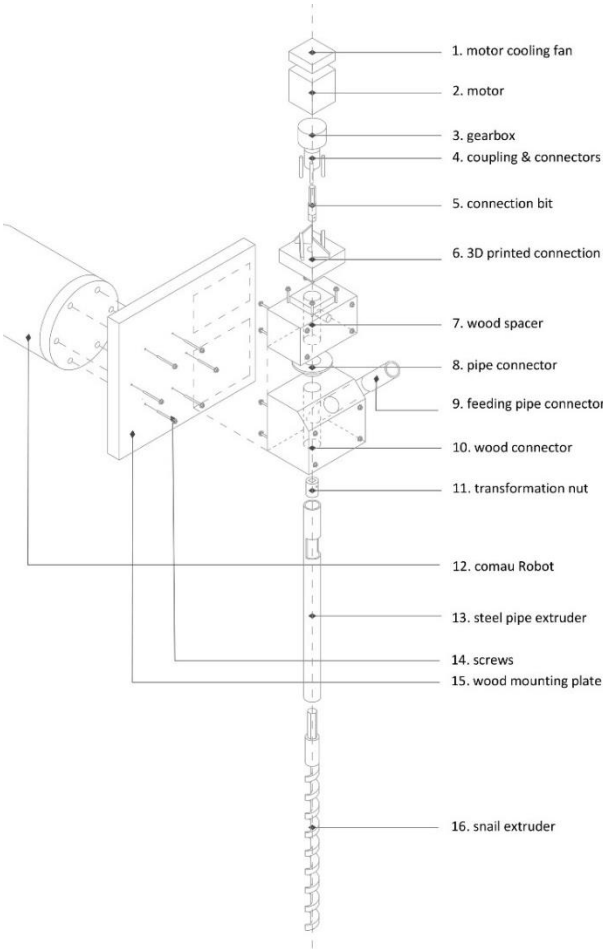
Autor’s: Rodiftsis, A., Mandat, M., isometric drawing of the planned paste extruder.
